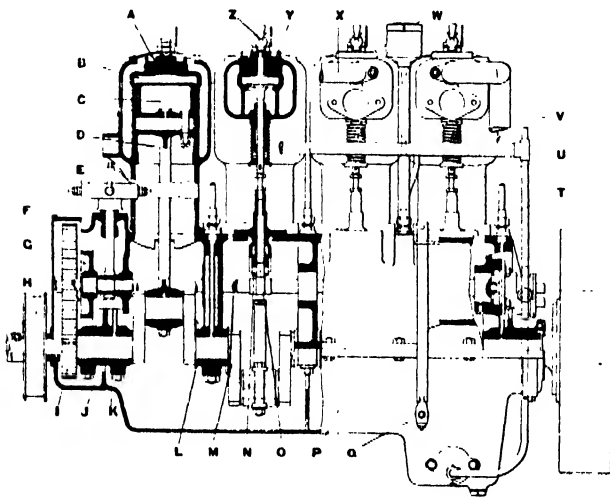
Engine of Argyll 14-16 H.P. Car, Half Sectional and Side Elevation
